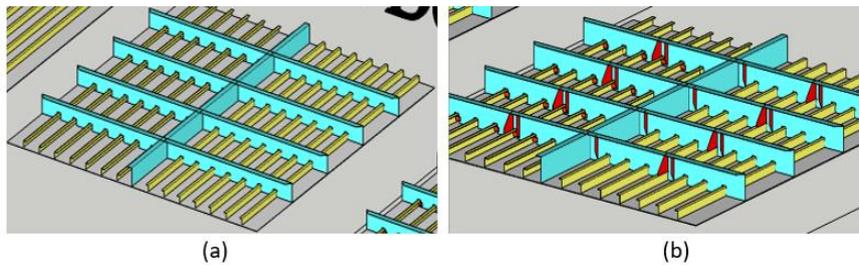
Joint (a) Girder to Plate, and (b) joint collar plate and tripping bracket to web frame
